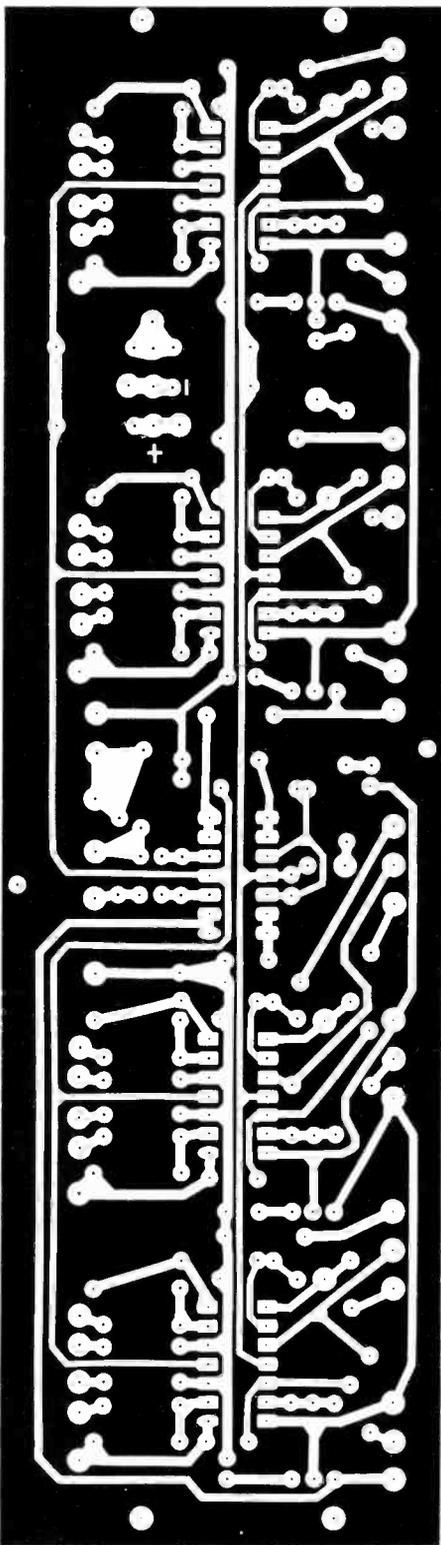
Actual-size etching and drilling guide for the main printed circuit board.
